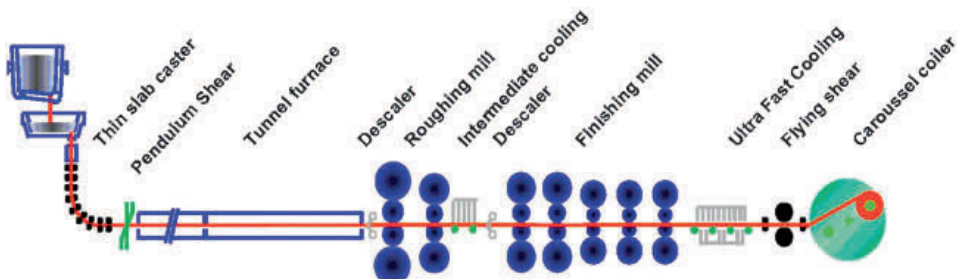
Layout of Tata Steel IJmuiden Direct Sheet Plant
